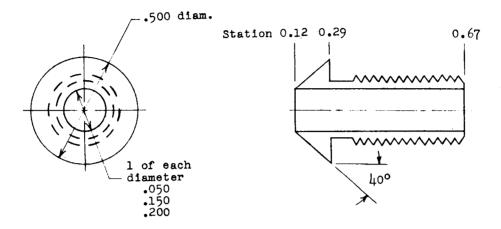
Drawing of 80° total-angle cone showing locations of thermocouples and pressure orifices. All dimensions are in inches.
